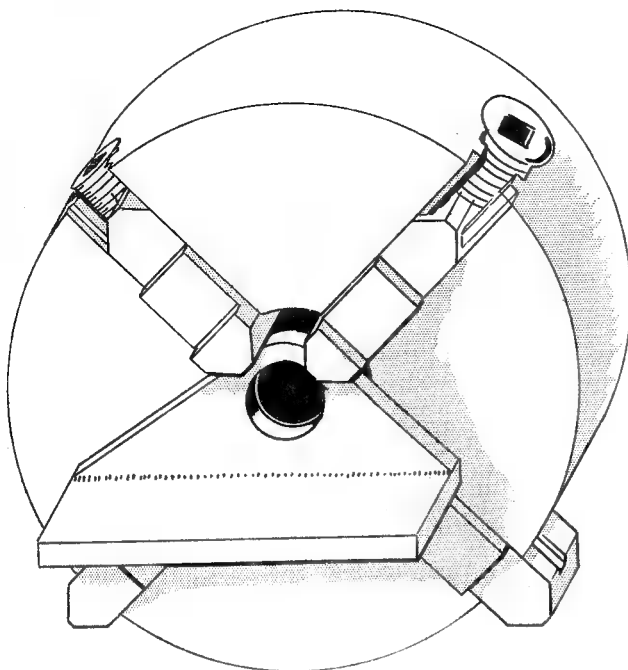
Mounting angle-iron in the 4-jaw chuck for drilling
